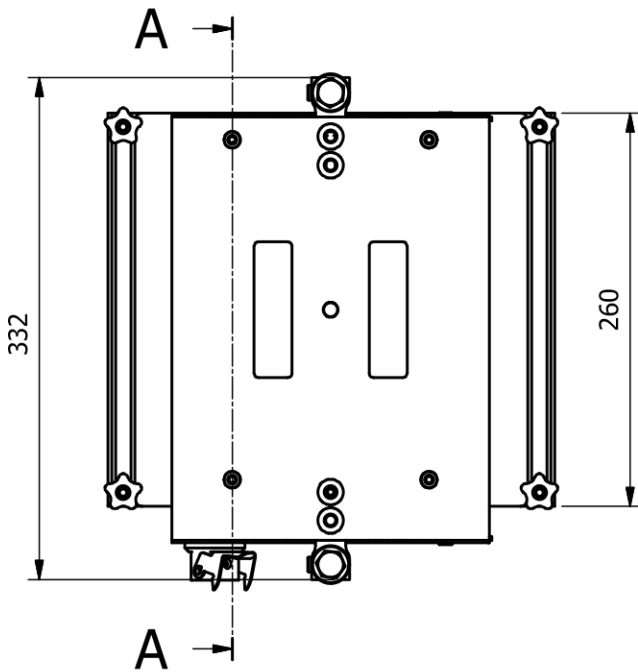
H08D016622 Welding plate PML-100
